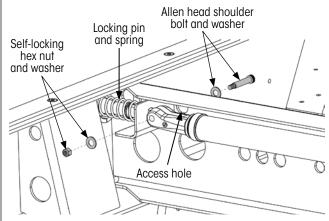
VANTRAAX® aftermarket actuator/locking pin assembly
